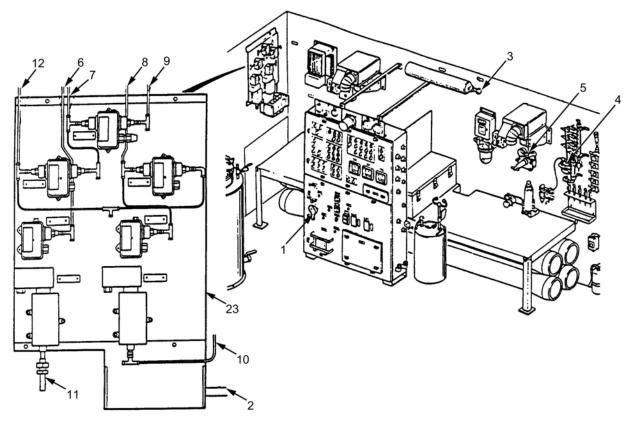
Pressure Switch Panel Assembly. (Model WTA-060 Only)
